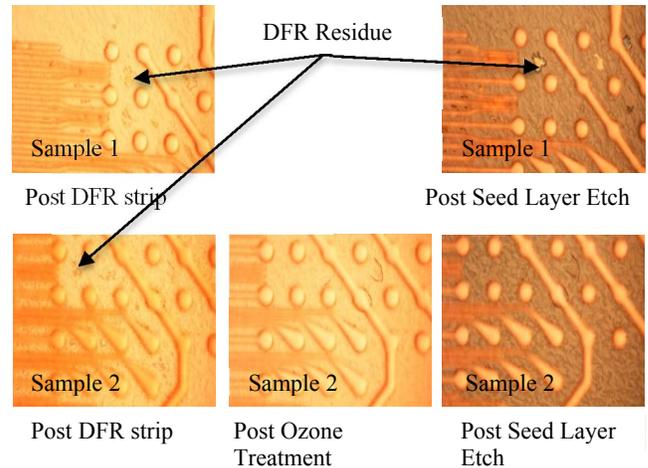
Removal of DFR residue after strip using Ozone treatment of a panel with RDL illustrating the complete removal of DFR residue with the ozone treatment leading to yielded panel with no residual seed layer. Note the removal of DFR residue from the seed layer surface after the ozone treatment on sample 2. Untreated DFR residue (sample1) result in partial removal of seed layer causing losses in panel yields
